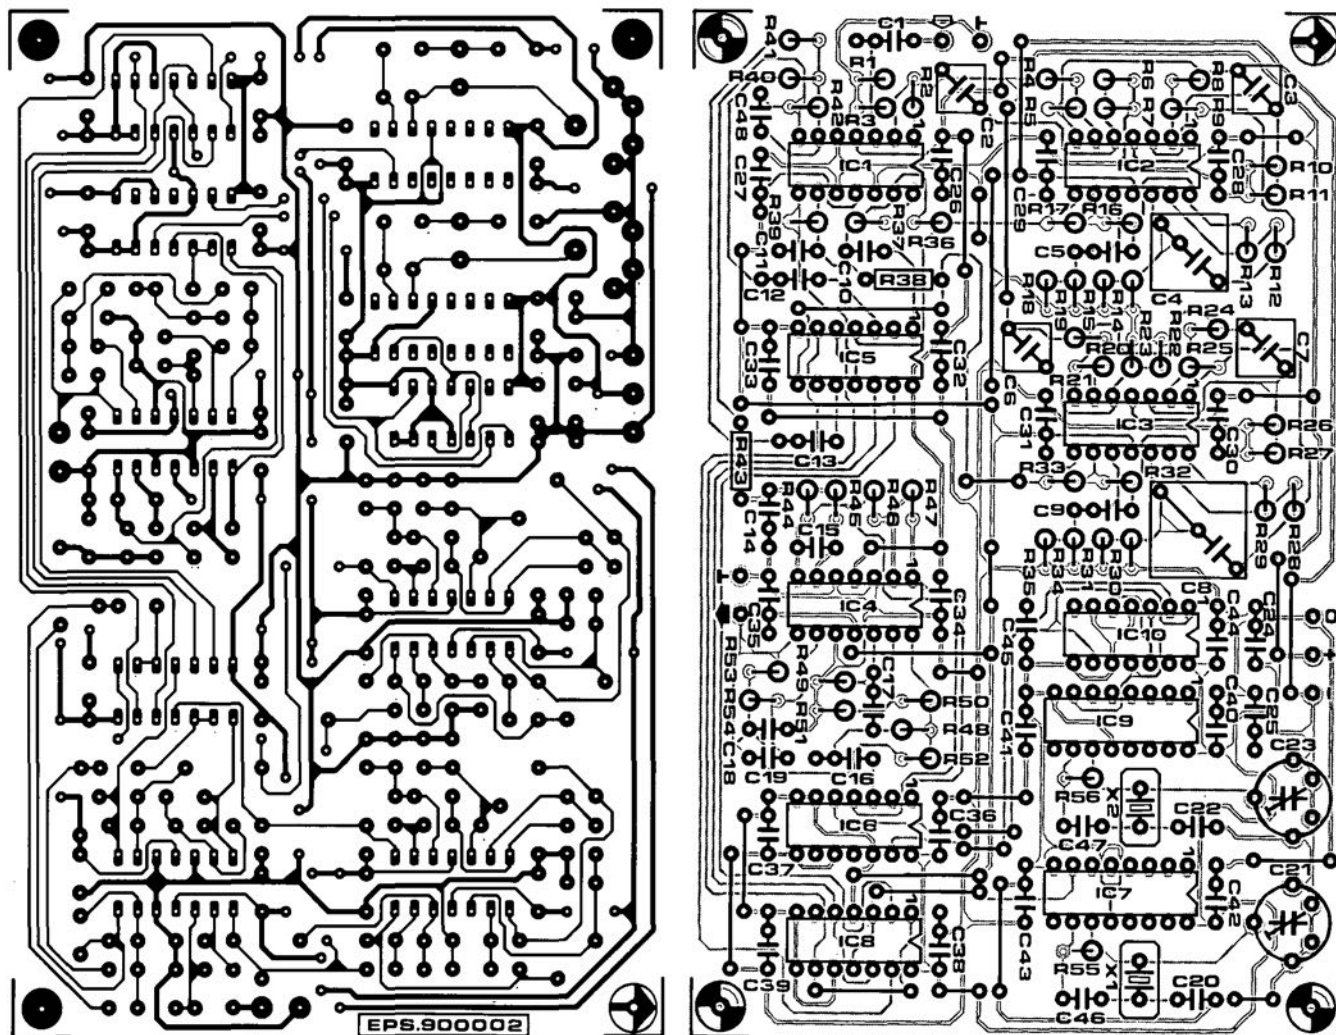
Track layout and component mounting plan of the printed-circuit board for the feedback killer.
